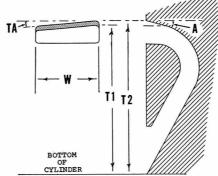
Raising the transfer ports will cause ports to open sooner. Angles of passage (A) and port (TA) direct fuel into cylinder and should be closely maintained.
